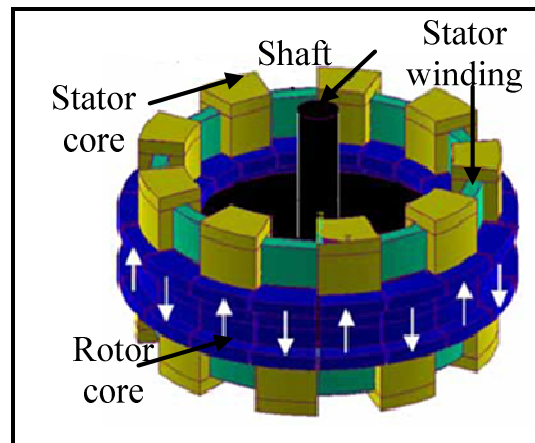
Double-sided surface-mounted TFPM machines.
